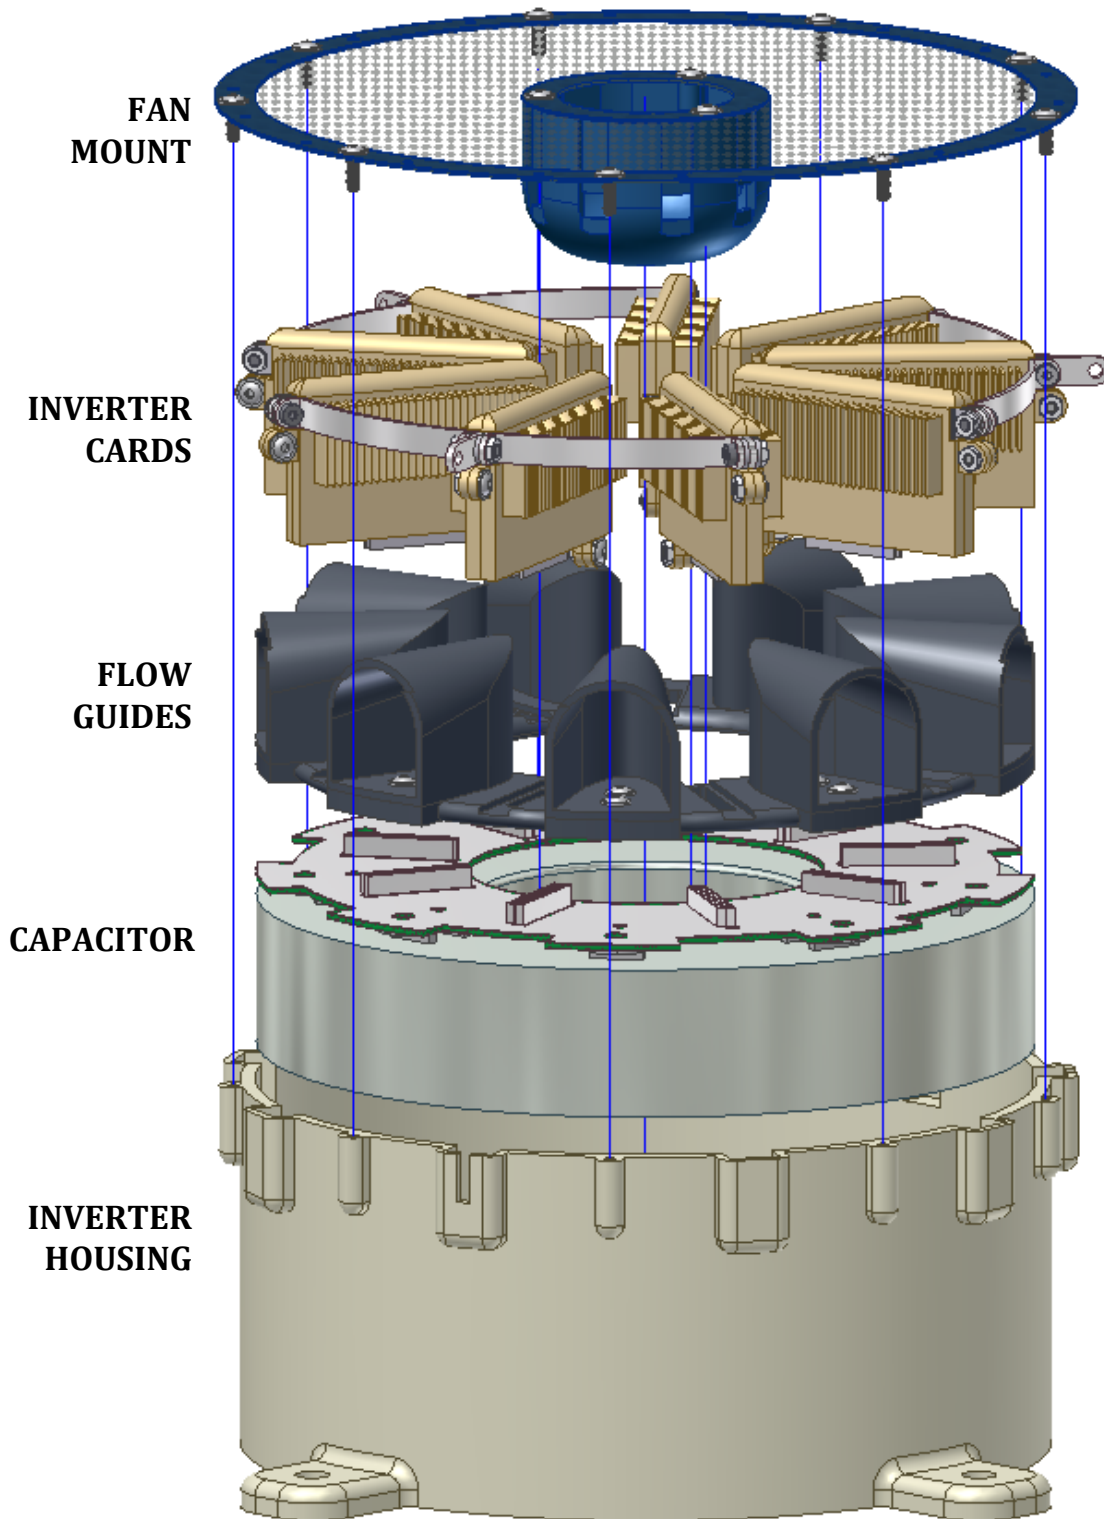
Exploded view the final axial inflow inverter concept, Revision GB
